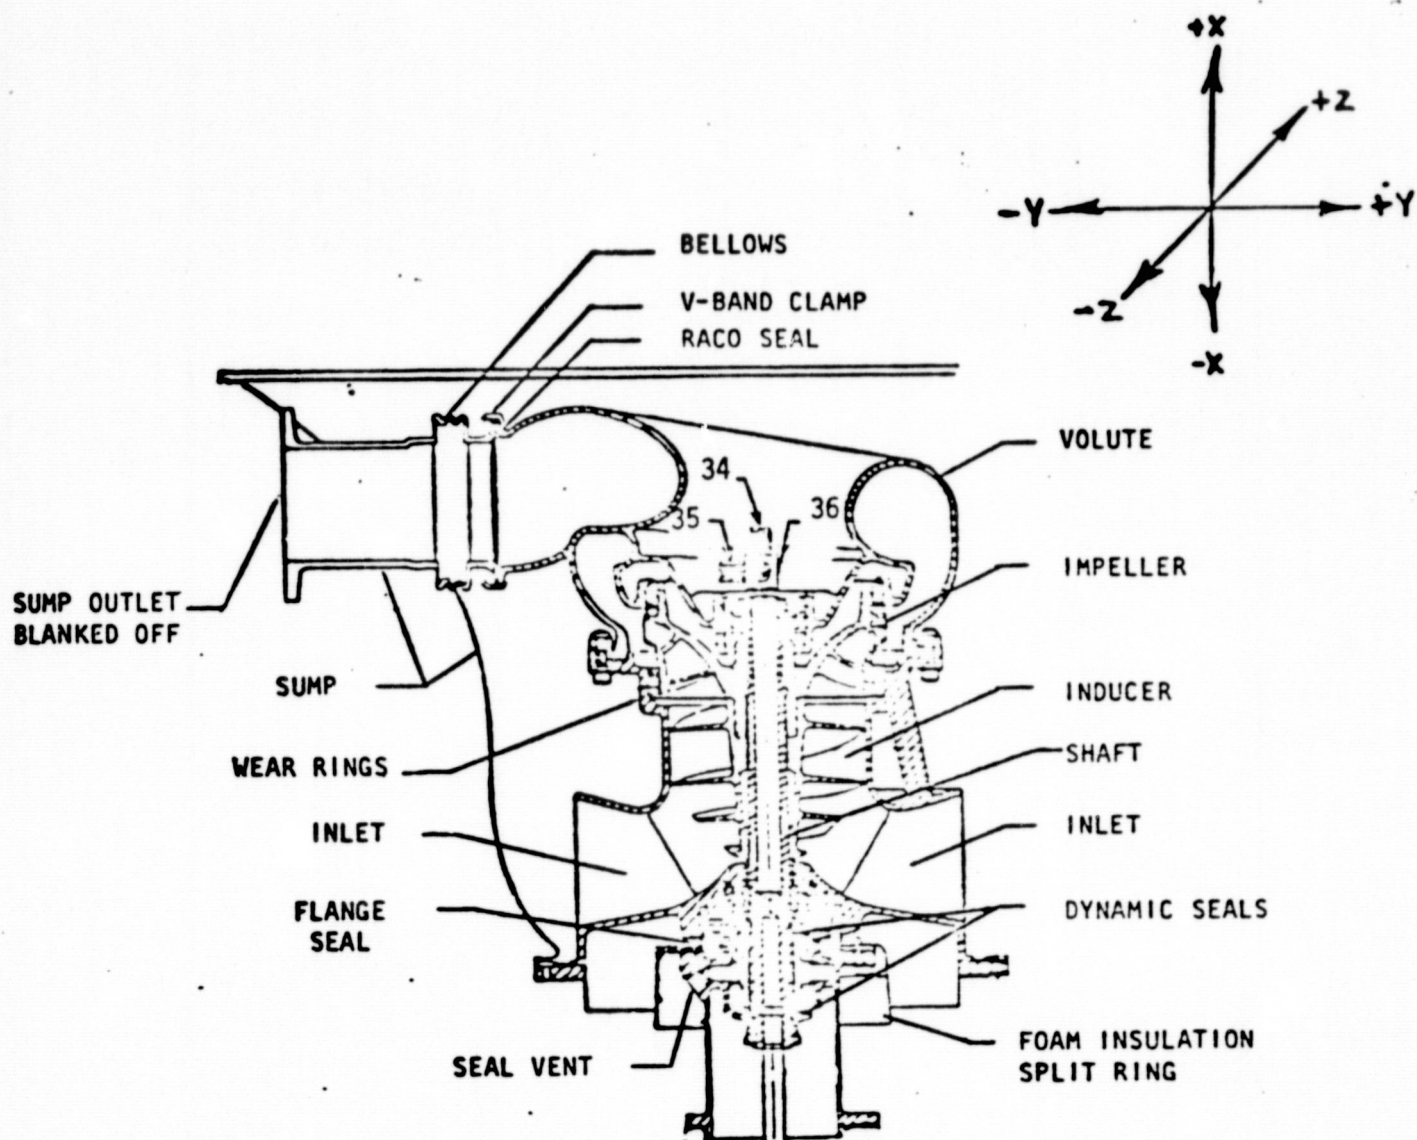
GENERAL VIEW SHOWING LOCATION OF THE PUMP SHAFT ACCELEROMETERS
